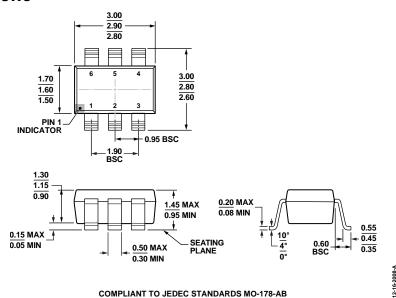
6-Lead Small Outline Transistor Package [SOT-23] (RJ-6) Dimensions shown in millimeters
